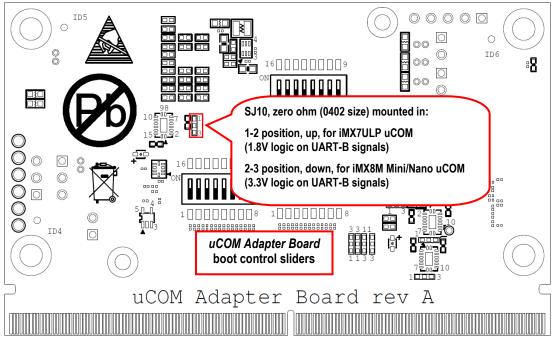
uCOM Adapter Board rev A, SJ10 Location, Bottom Side
